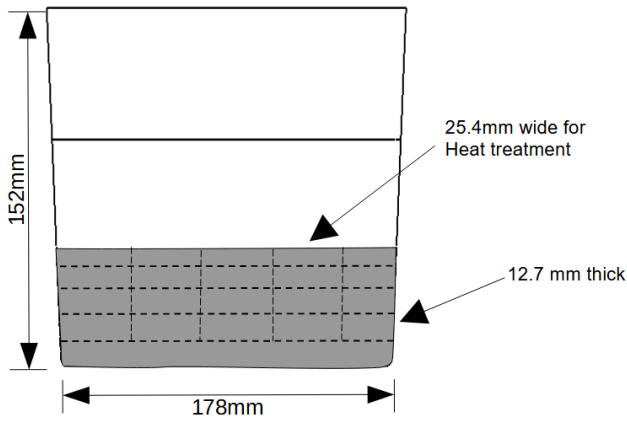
A 25mm thick, 152mm height, and 178mm wide Y-block casting was employed in this experiment.
